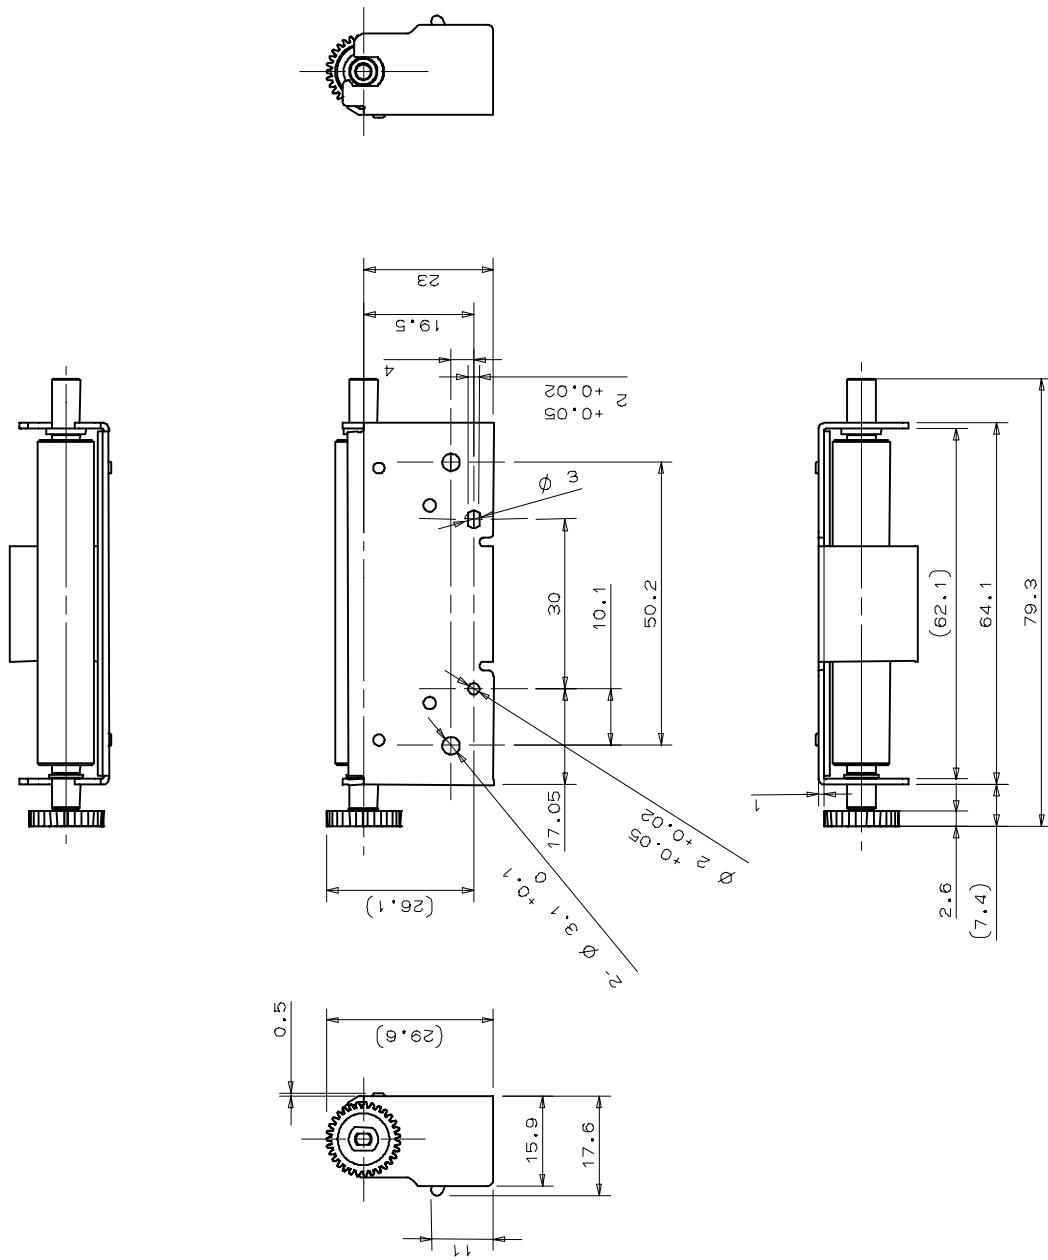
shows the appearance and the external dimensions of the LTPF247.
